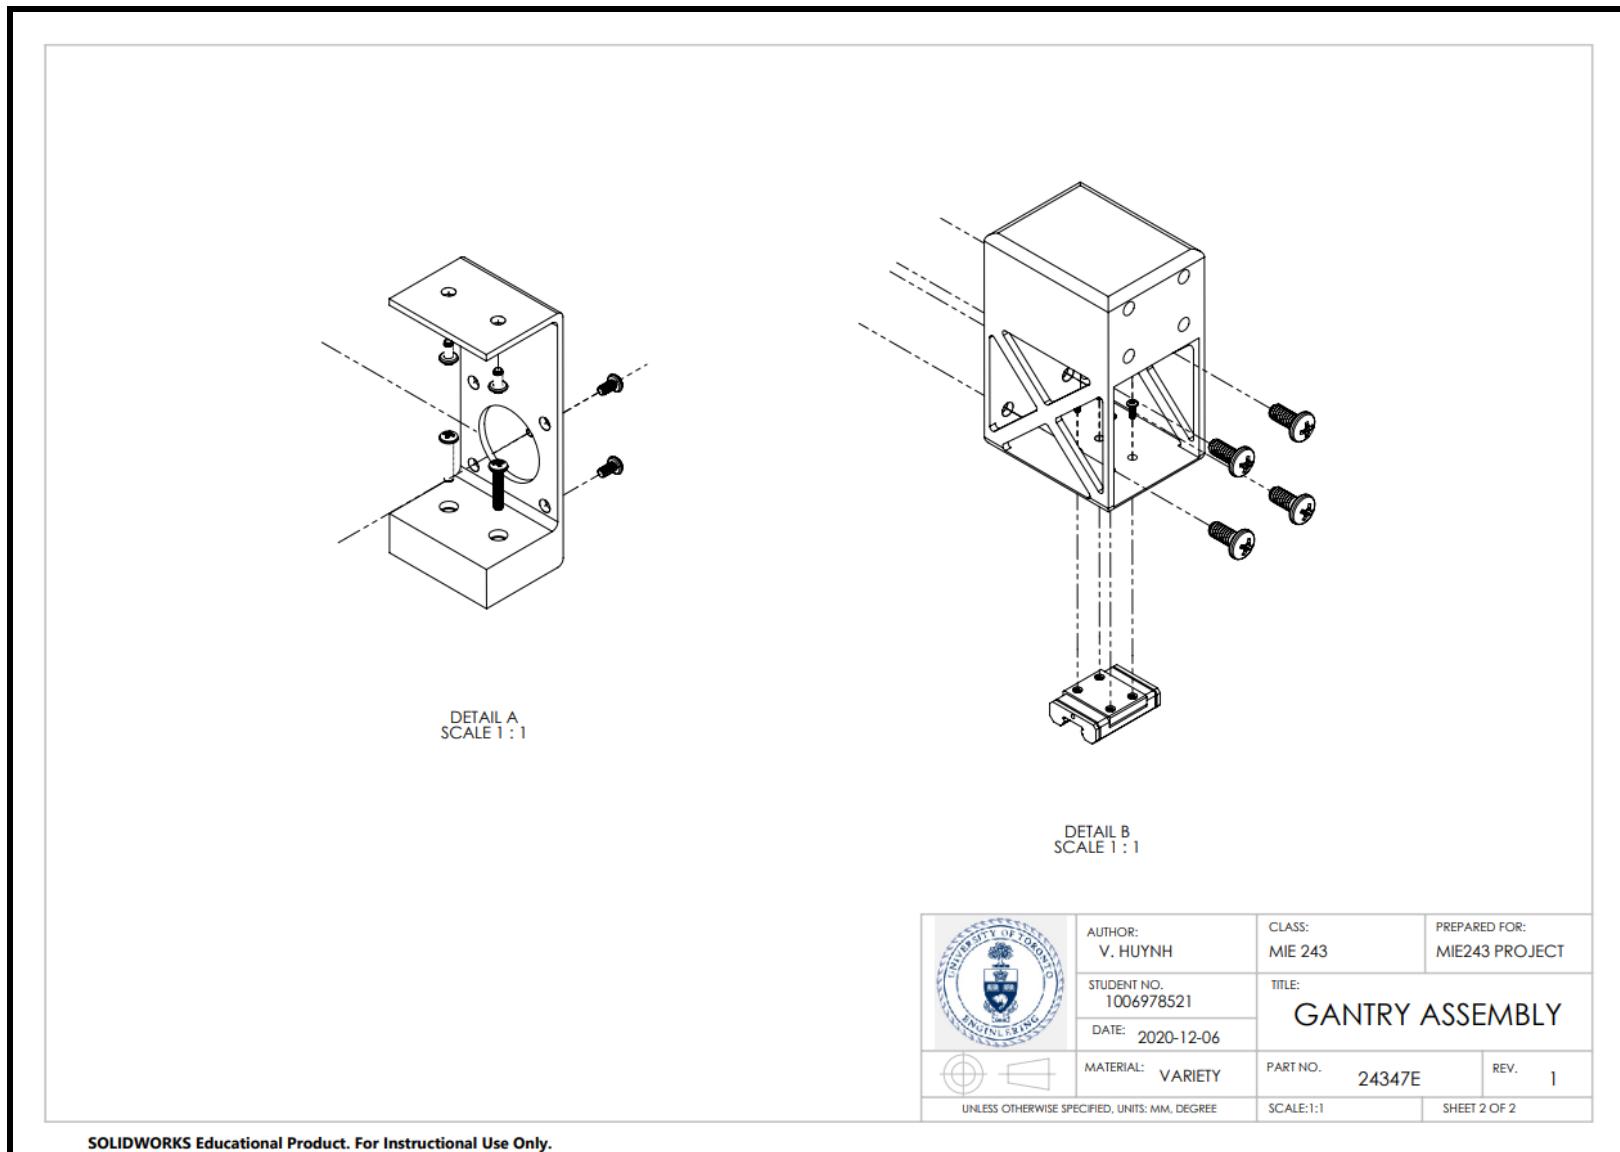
Sheet 2 of the full gantry assembly, it covers the detailed views of sheet 1.
